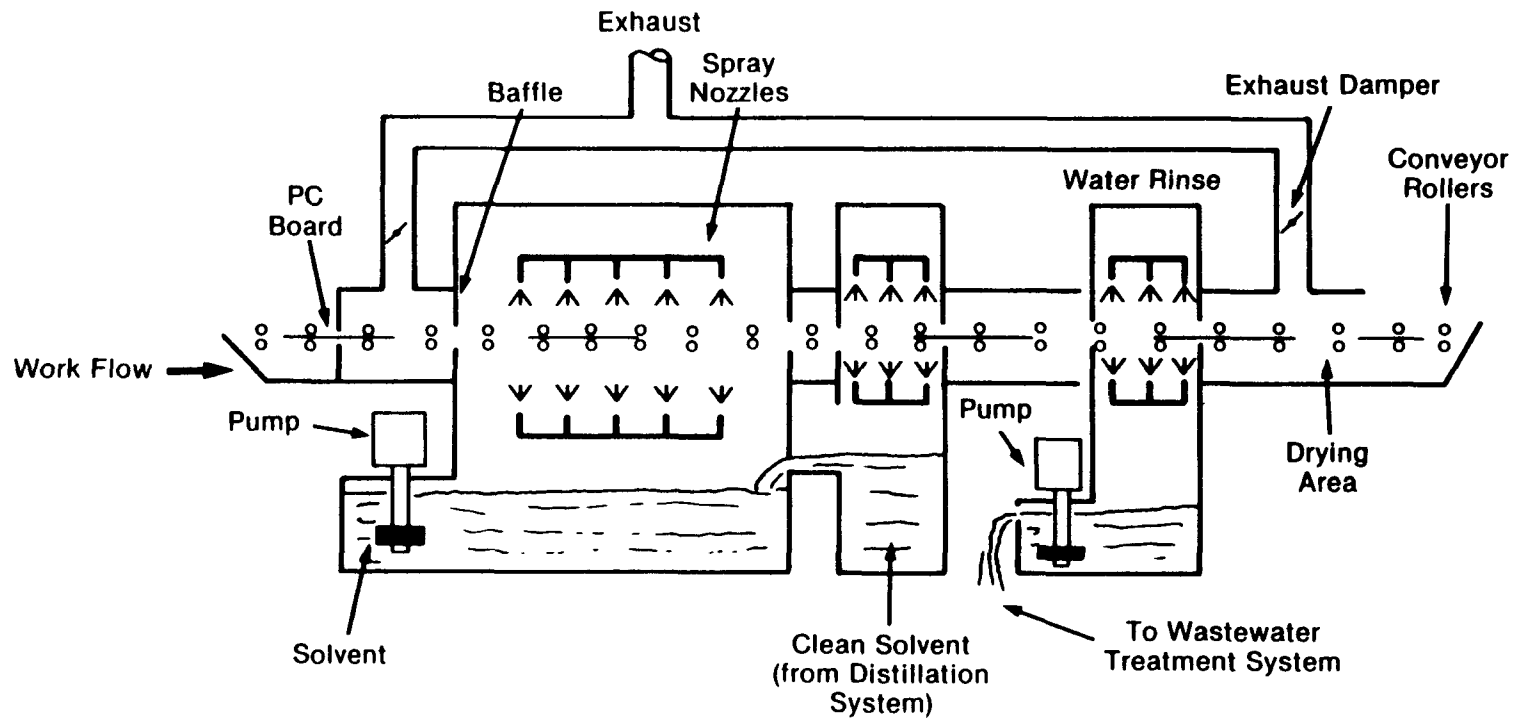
Schematic Diagram of an In-line Photoresist Stripping Machine
